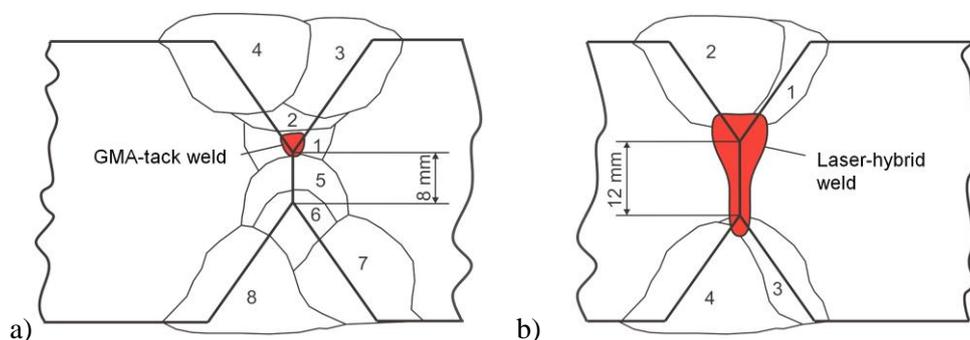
Comparison between two welding technologies: longitudinal weld consisting of a GMA-tack weld and SAW filler layers (a); longitudinal weld consisting of a laser-hybrid weld and SAW filler layers (b)
